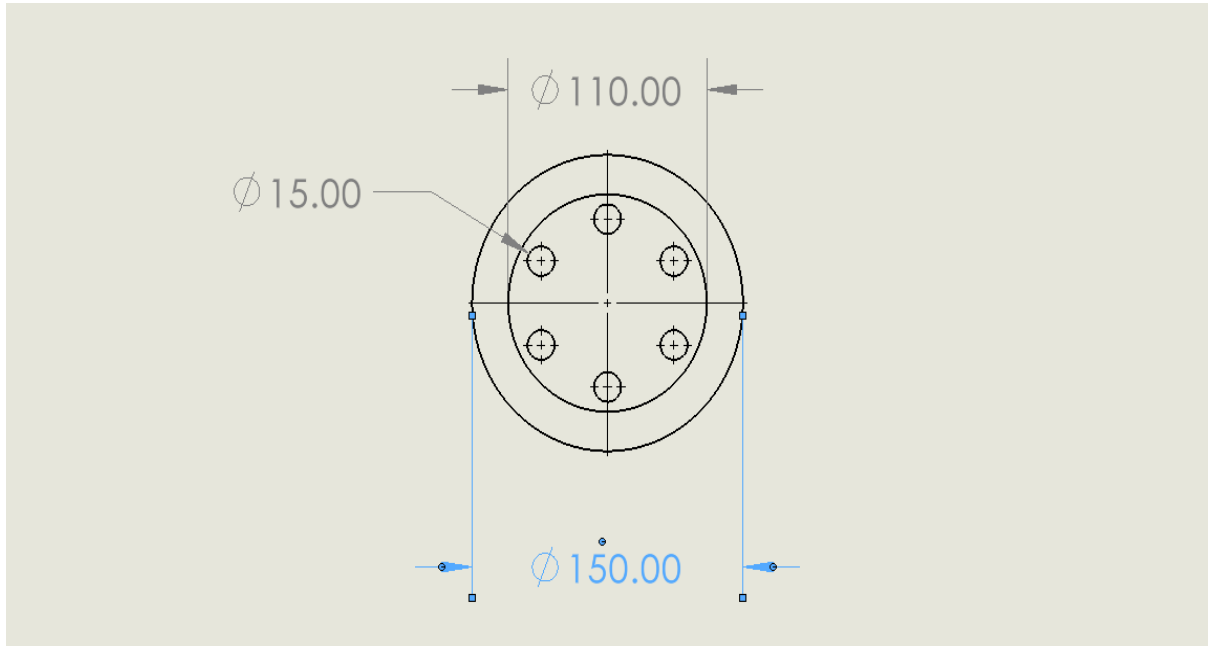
Dimensions of CAD model of Plain Bucket (Top View)
